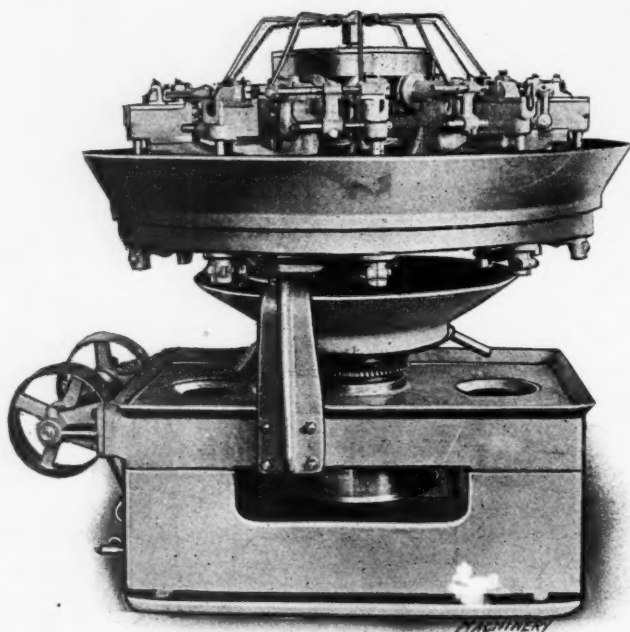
Front View of Langelier Cotter Pin Hole Drilling Machine
